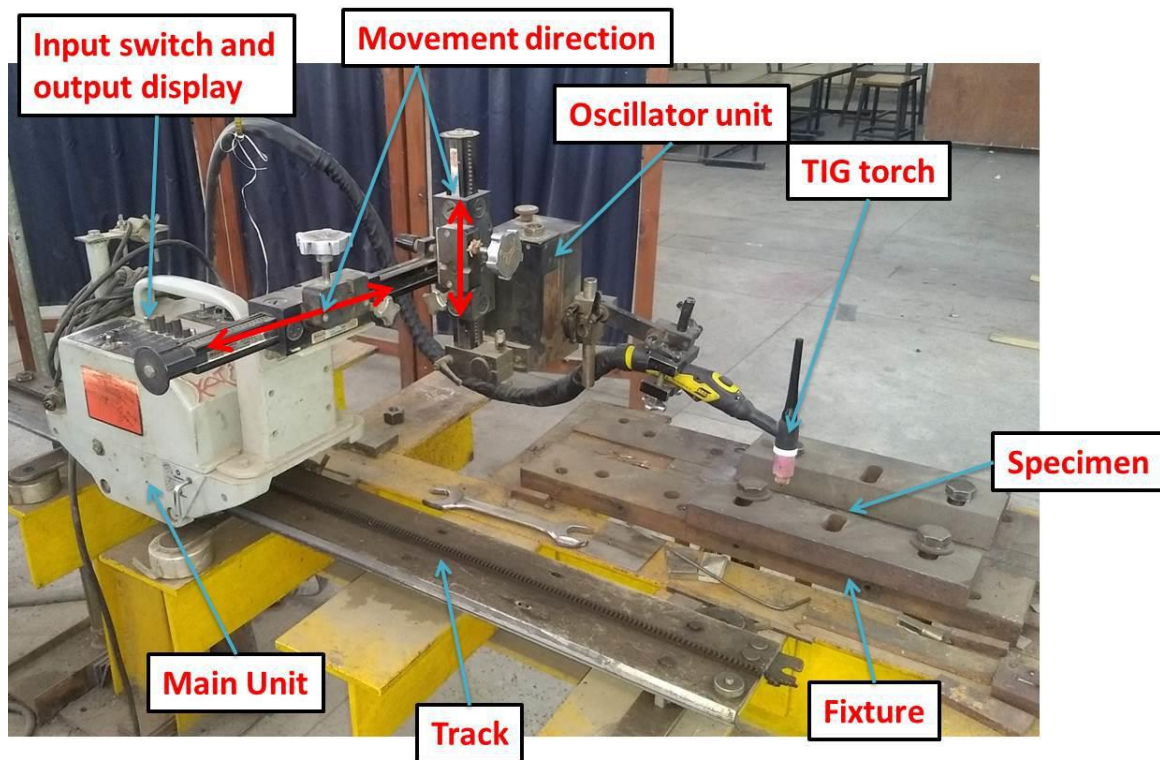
Photograph of Torch Manipulator and fixture.
